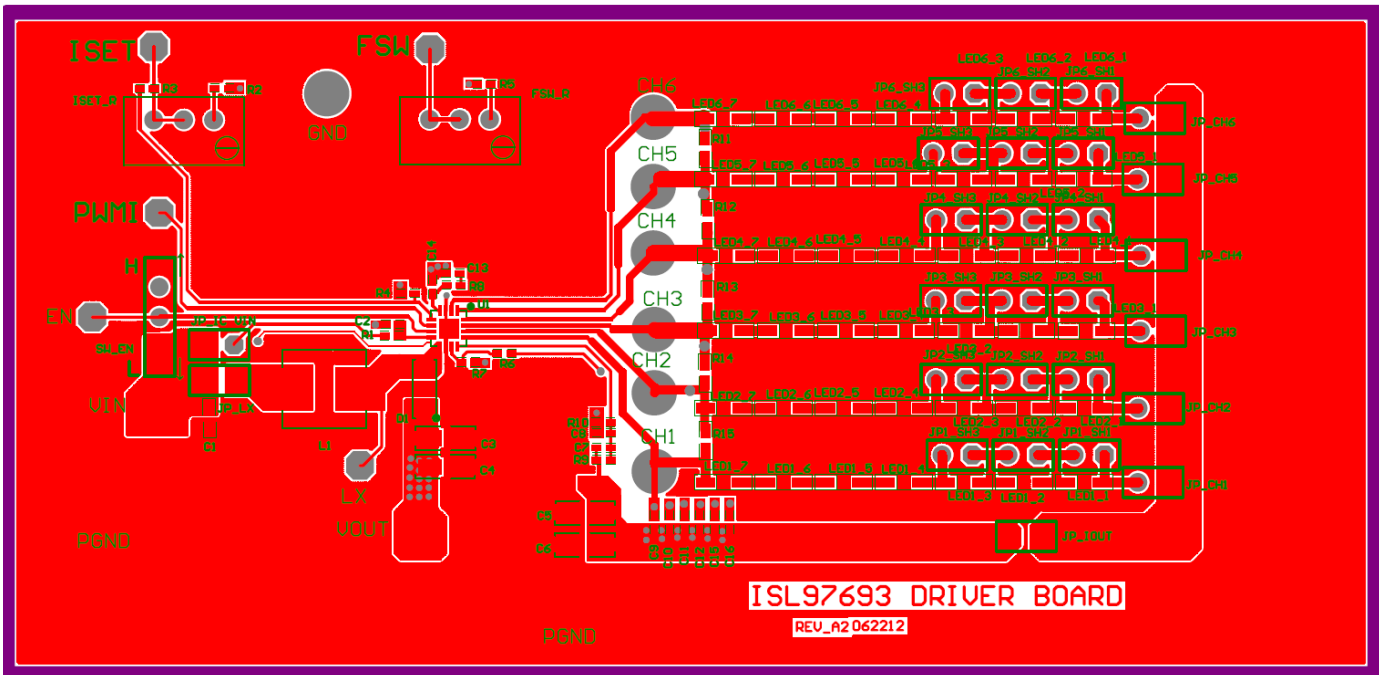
PCB LAYOUT (TOP LAYER) OF ISL97693IRTZ-EVALZ BOARD
